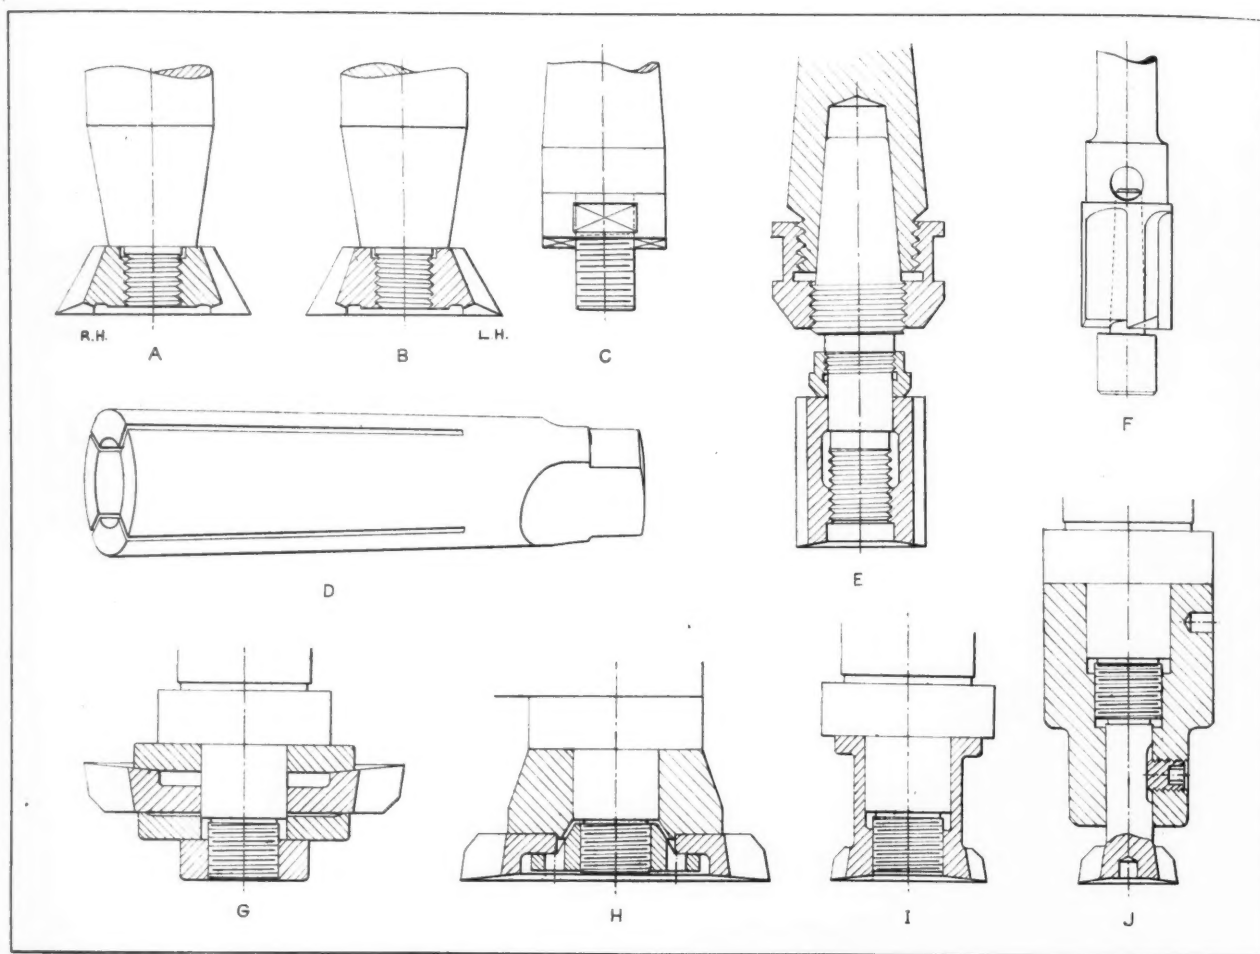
Threaded Arbors for Milling Cutters; Split Taper Socket; and Cutter with Taper Shank Pilot
